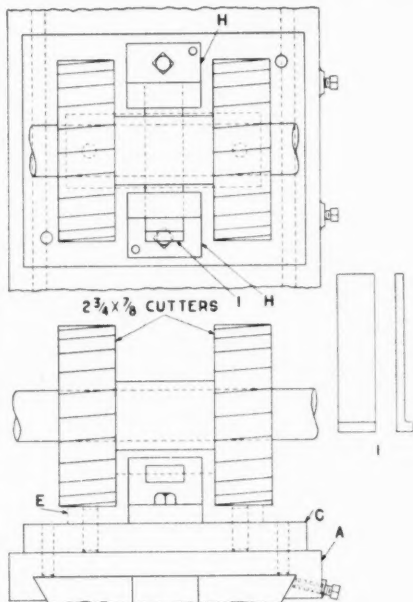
Set-up for machining the remaining surfaces of the part shown in Fig. 1.
